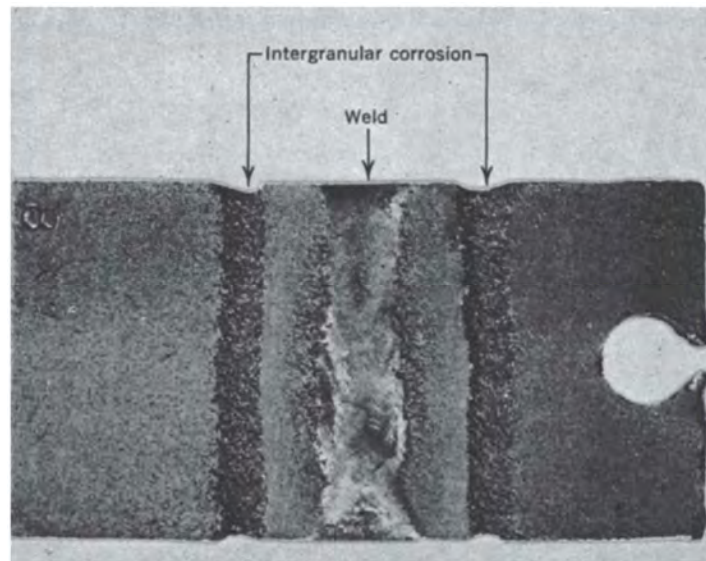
Weld decay in a stainless steel. The regions along which the grooves have formed were sensitized as the weld cooled.
